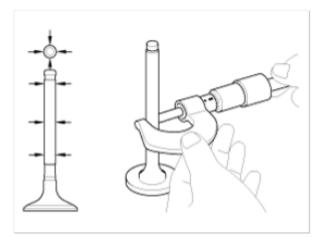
Measuring Valve Stem Outer Diameter Using Micrometer Courtesy of HYUNDAI MOTOR AMERICA
